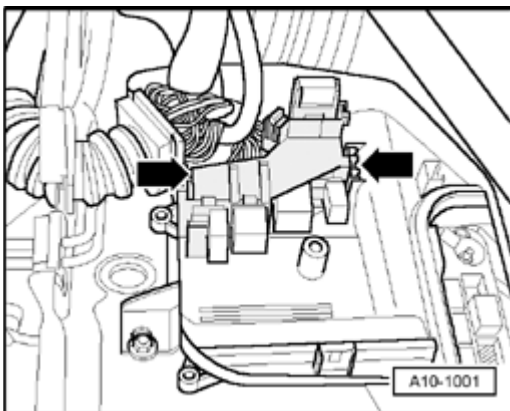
Disengaging Locking Mechanisms And Removing Secondary Relay Carrier In E-Box Toward Top
